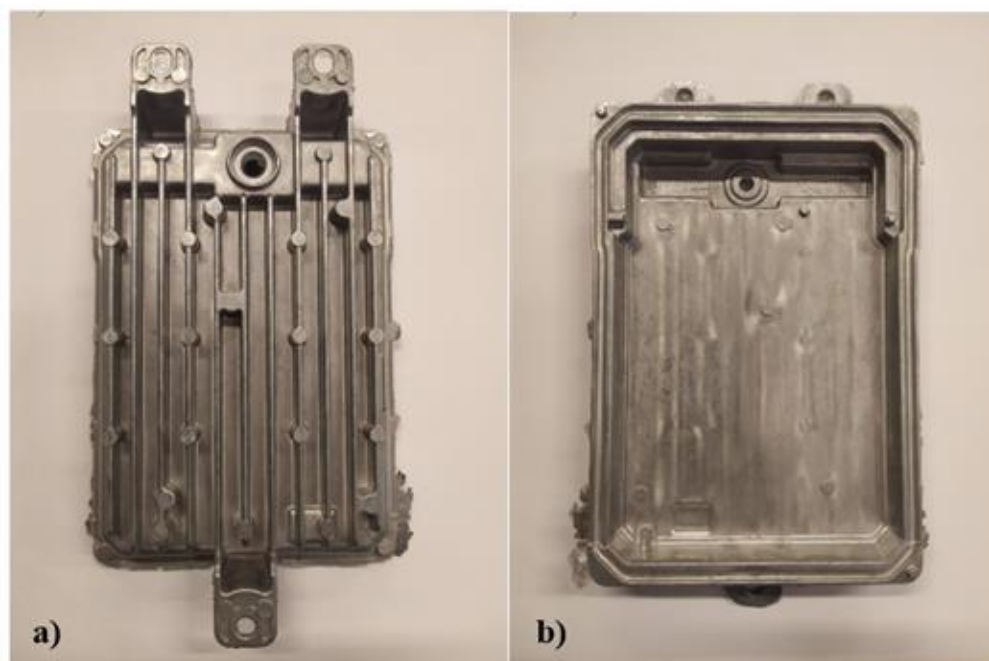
Power electronics casing: (a) top view of the part, (b) bottom view of the part.
